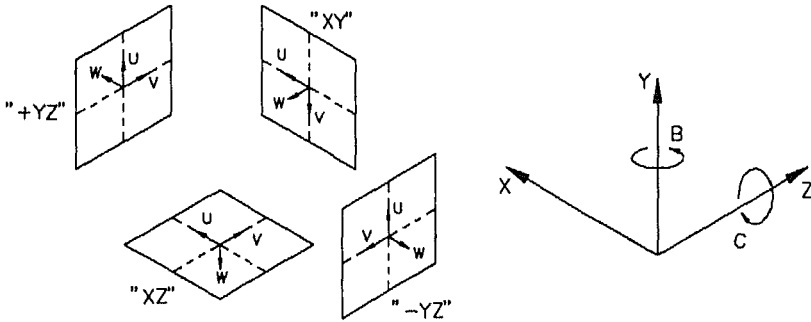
Test-workpiece orientation with workpiece coordinateframe
